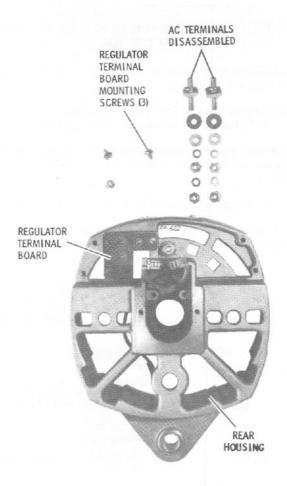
TYPICAL REAR HOUSING TERMINAL REMOVAL
